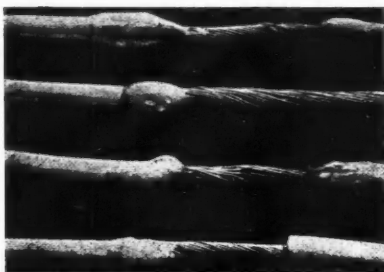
Copper cable connected with aluminium wire by hard soldering.
